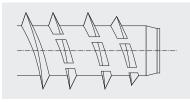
The cuts on the first three leads remove material during threanding, reducing thread forming torque and boss bursting.
